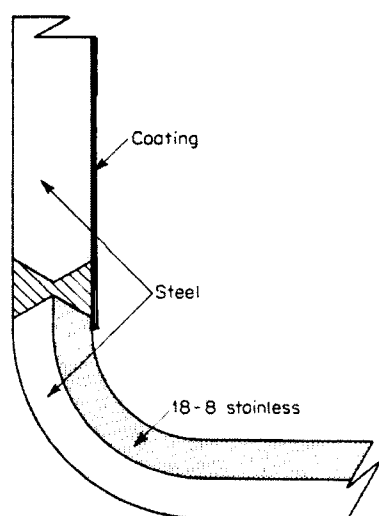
Detail of welded steel and stainless clad tank construction.
